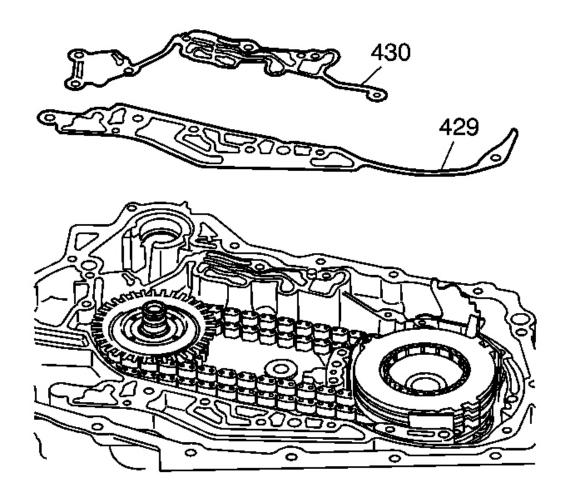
View Of Case Cover Upper & Lower Gasket Courtesy of GENERAL MOTORS CORP.
